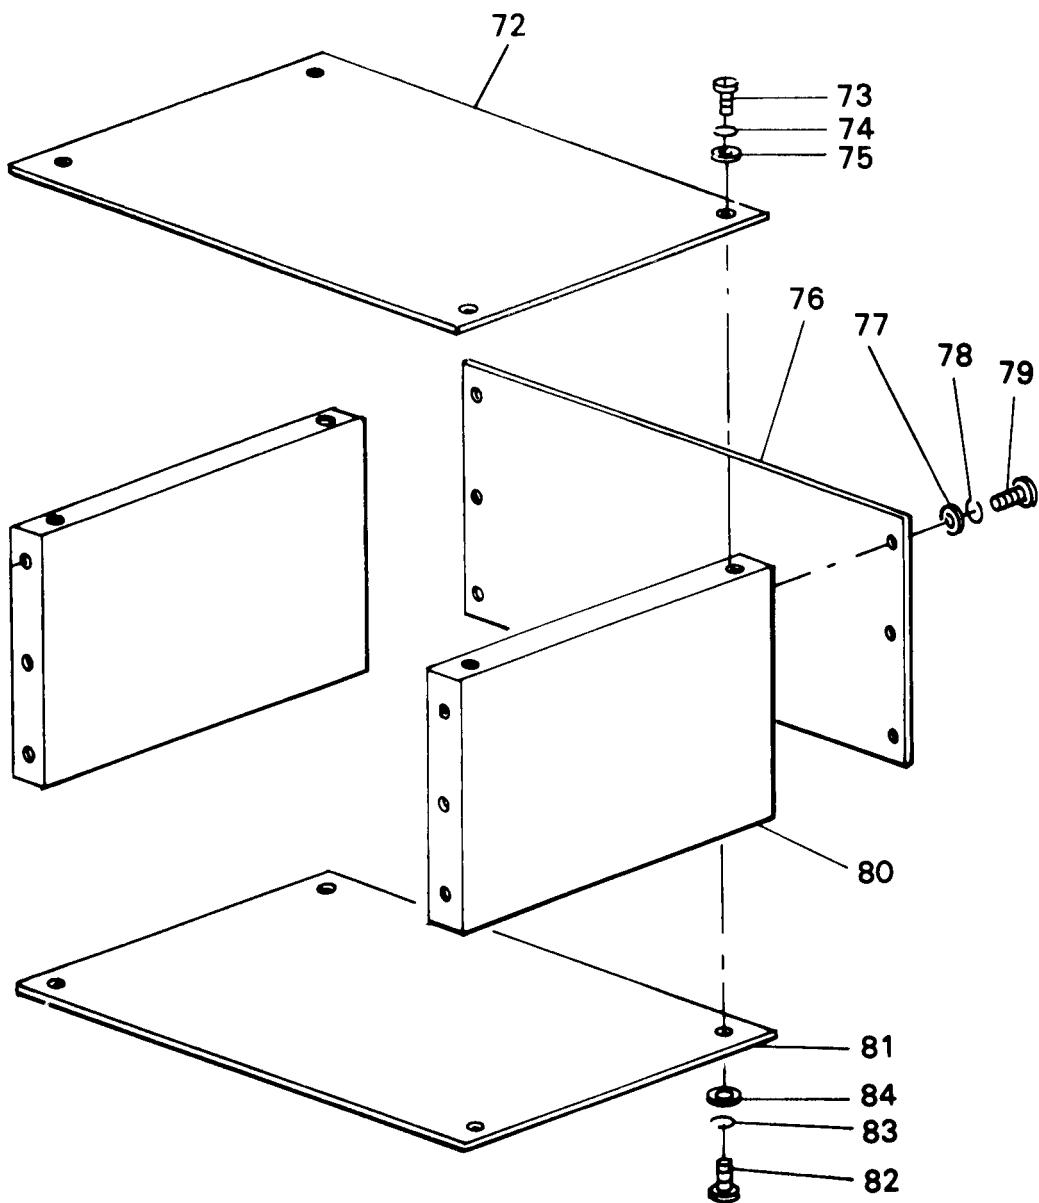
Main Assembly 0376-746 (Back Panel) (Sheet 3 of 4)
